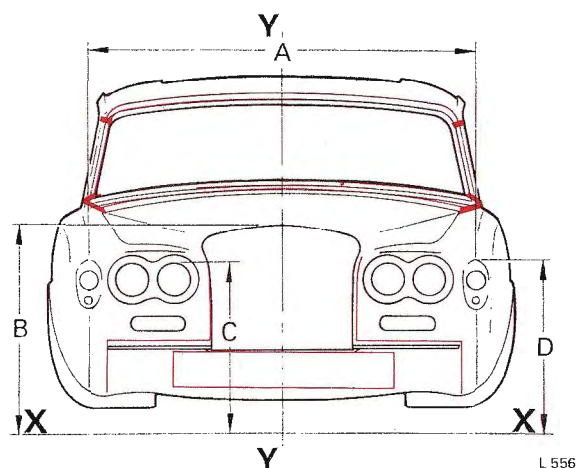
FRONT VIEW OF BODY (4-Door Saloon and Long Wheelbase Cars)
